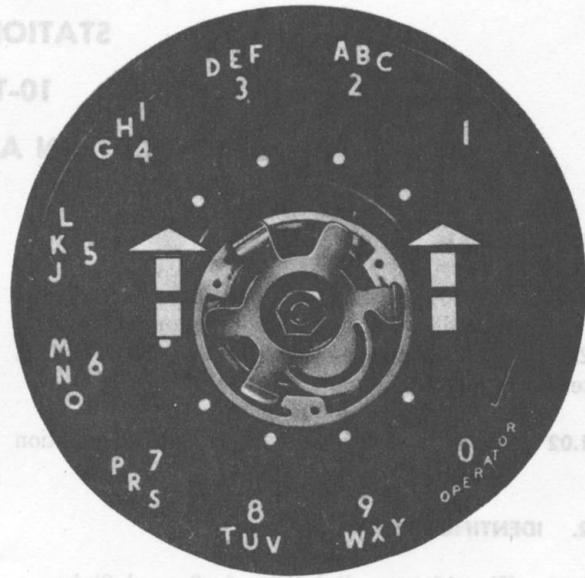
Lock Ring in Extreme Forward Position for Removal
